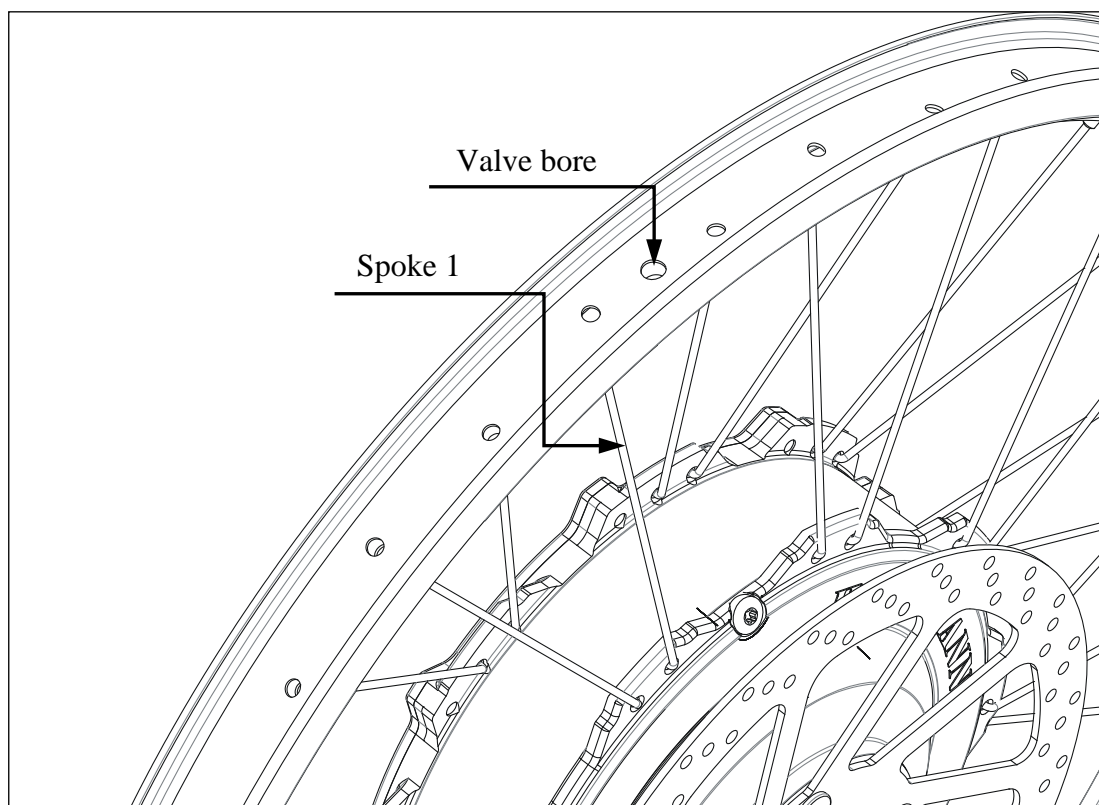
Spoke pattern front wheel, rim 20" or 24", without crossing
